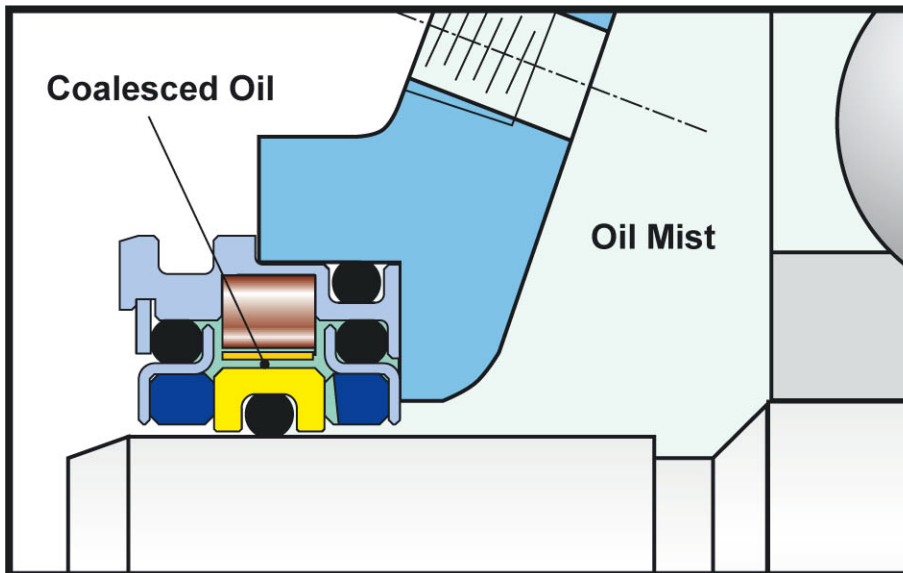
Dual-face magnetic bearing protector seal in oil mist service
